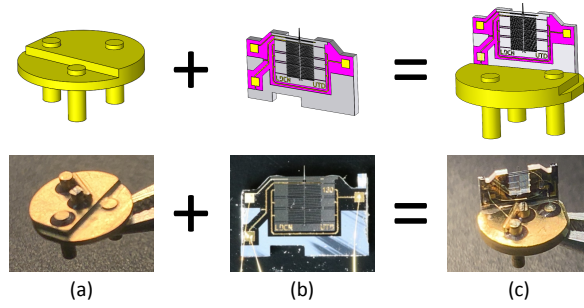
Mounting the MEMS device on tip holder: (a) tip holder (b) MEMS device (c) MEMS assembly.
